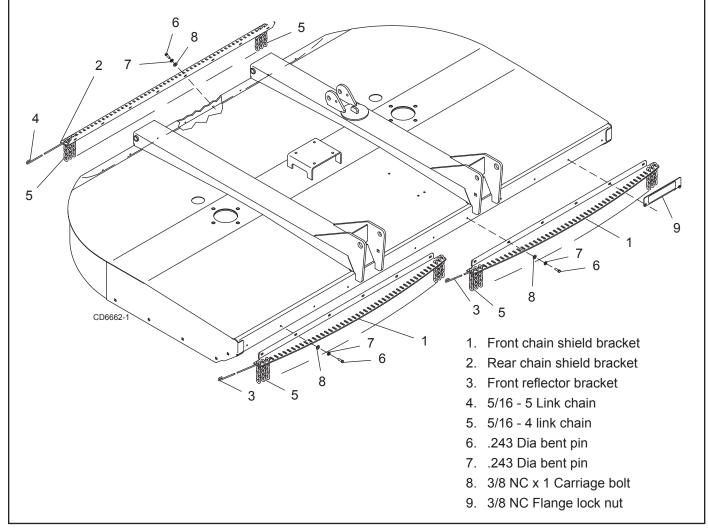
DS8.30 & DS10.40 Optional Chain Shielding Installation
